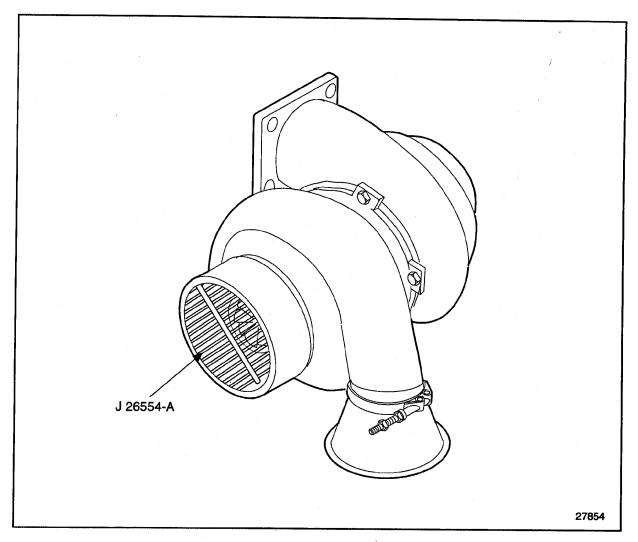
Turbocharger Compressor Inlet Shield, Series 60G Engine
